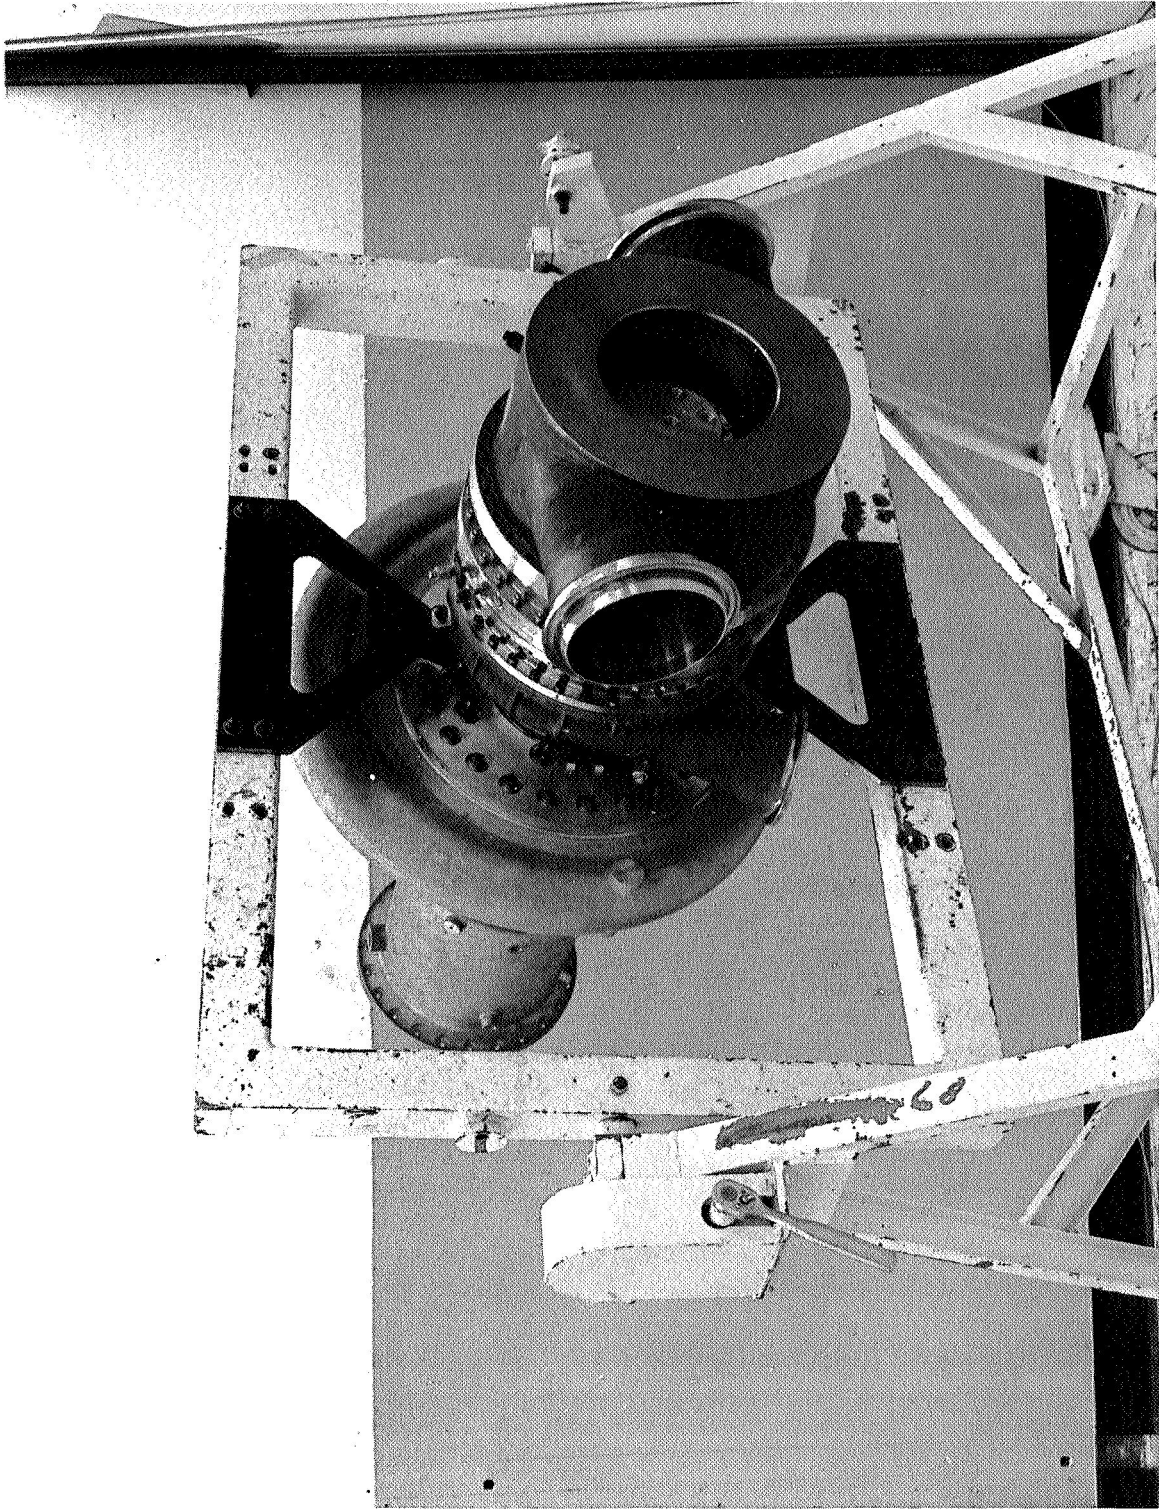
View of Turbopump Assembly in Build-Up Stand.
